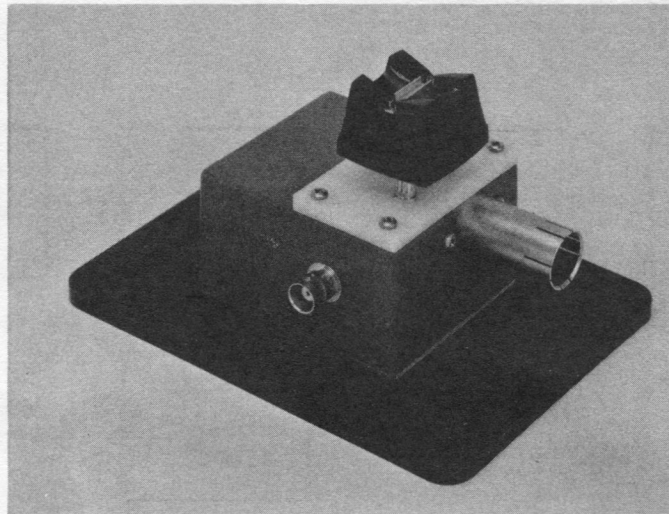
PHOTOGRAPH OF THE TEST FIXTURE
